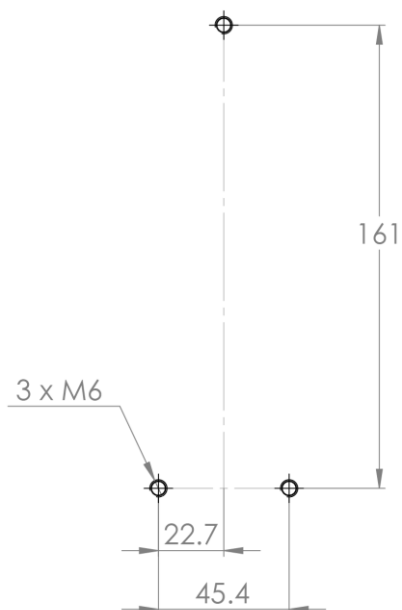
Remote Pendant Cradle Mounting Hole Pattern (mm)
